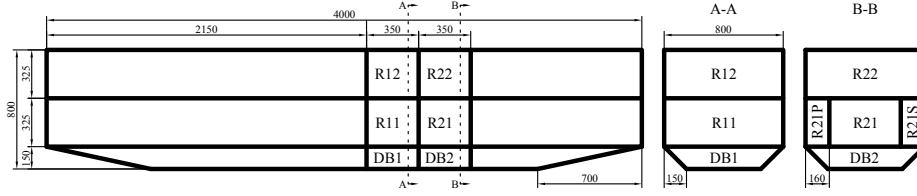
Internal Subdivision of the box-shaped barge (dimensions in mm)
